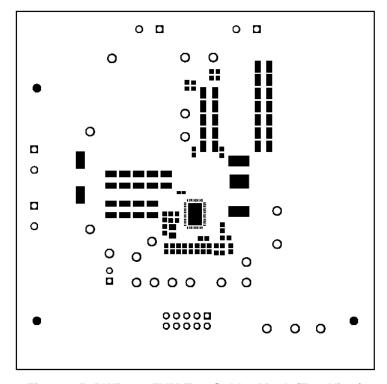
PWR-784EVM Top Solder Mask (Top View)
